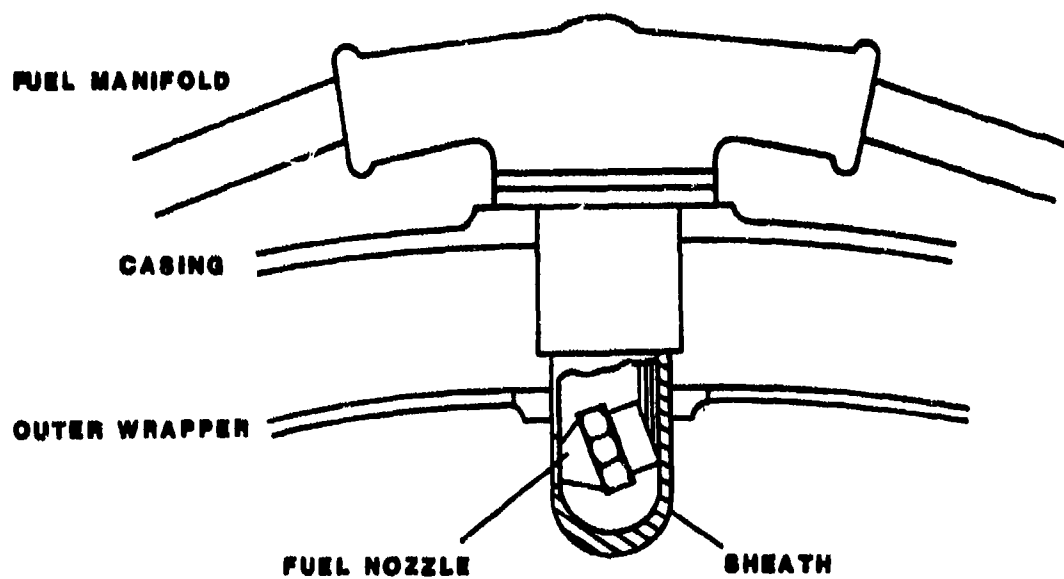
PT6A-65 Fuel Nozzle and Sheath Assembly
